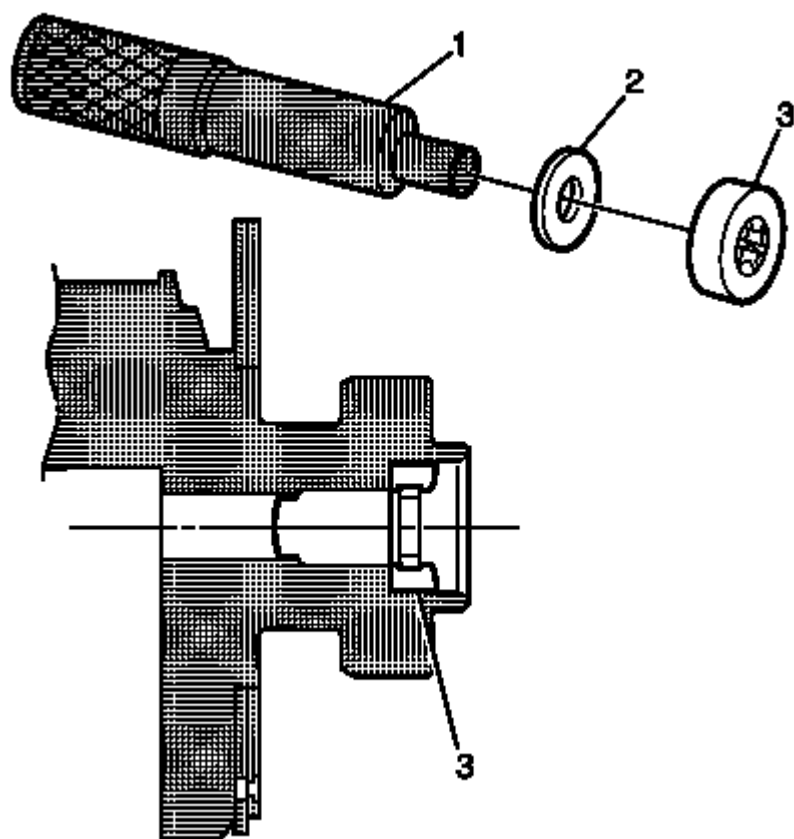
Locating J 38836, 5/8 Inch Flat Washer & Clutch Pilot Bearing
